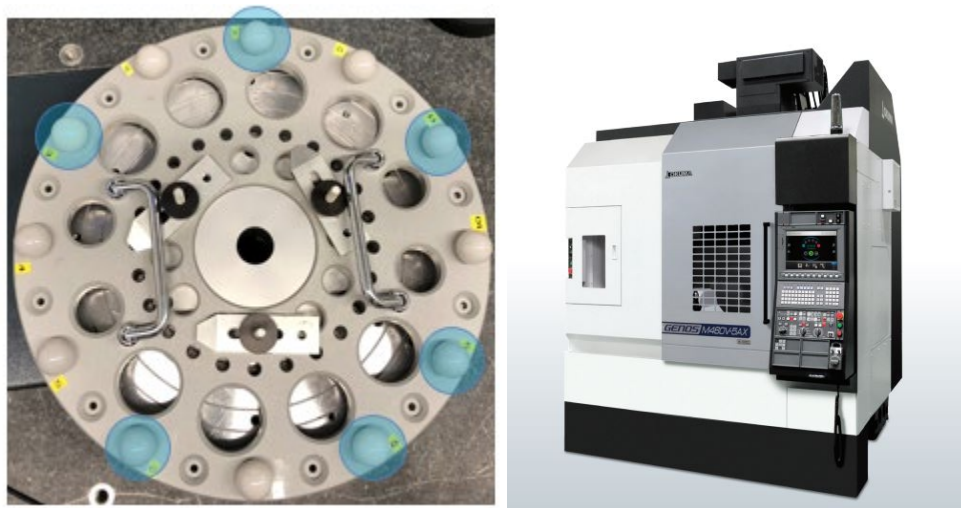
A conventional PTB ball plate with selected balls for the reduced method (Left) and a 5-axis machine tool from unfunded partners NCMT (Right)
